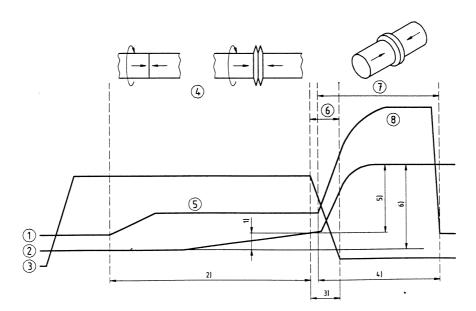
Diagram showing direct drive rotational friction welding
